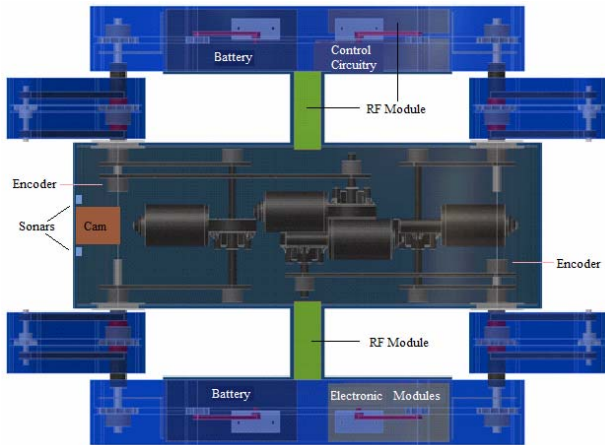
Layout of the internal modules, which include the electronic components, motors and drive system
